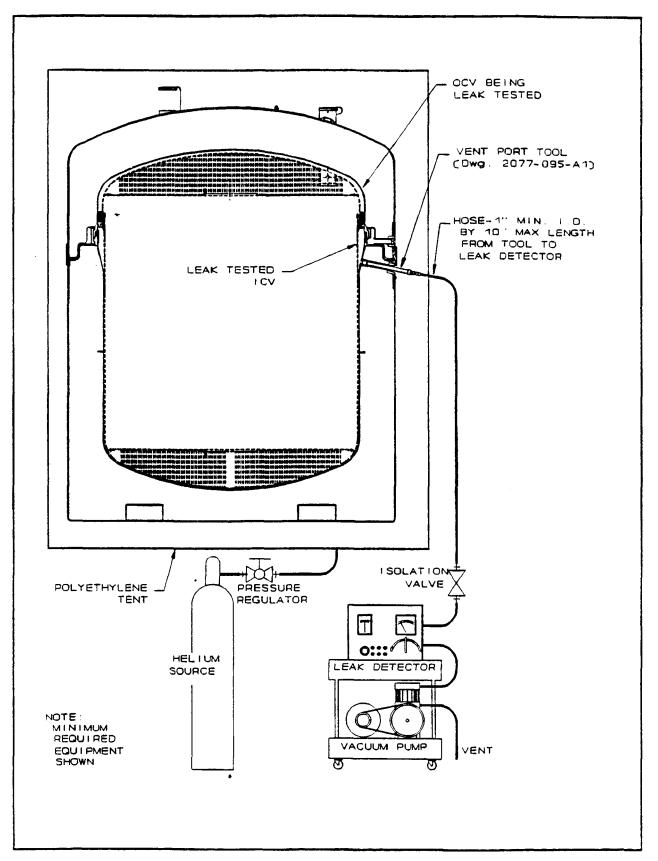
Vessel Weld Leak Test Setup Support Arrangement for Assembled
